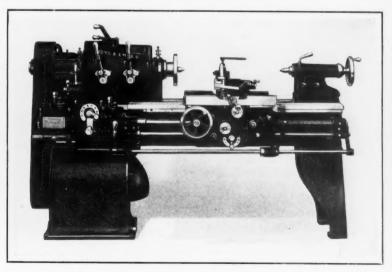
Boye & Emmes "Coneless" Engine Lathe Built in 14and 16-inch Sizes
